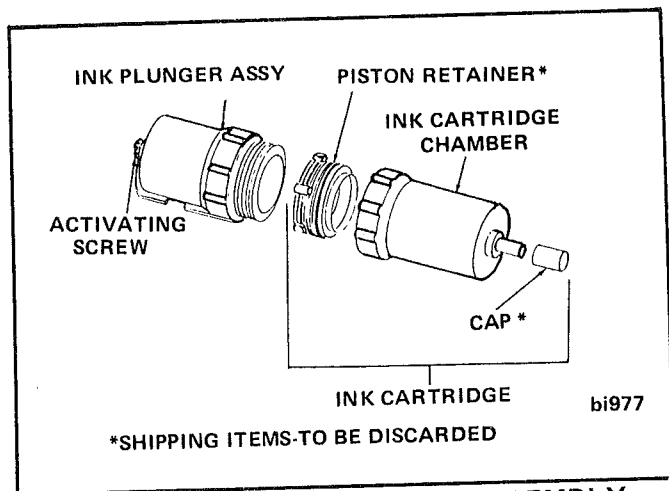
INK CARTRIDGE ASSEMBLY
